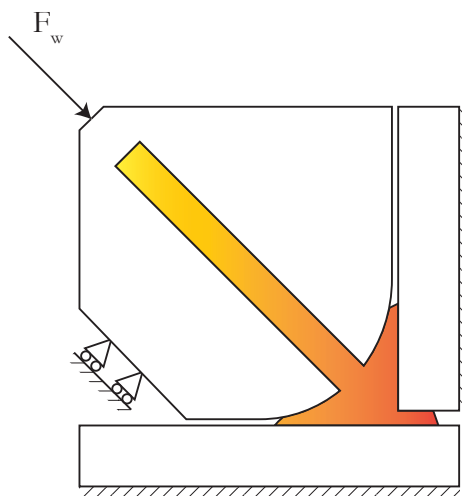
Welding force as an indicator for the pressure on the weld.
